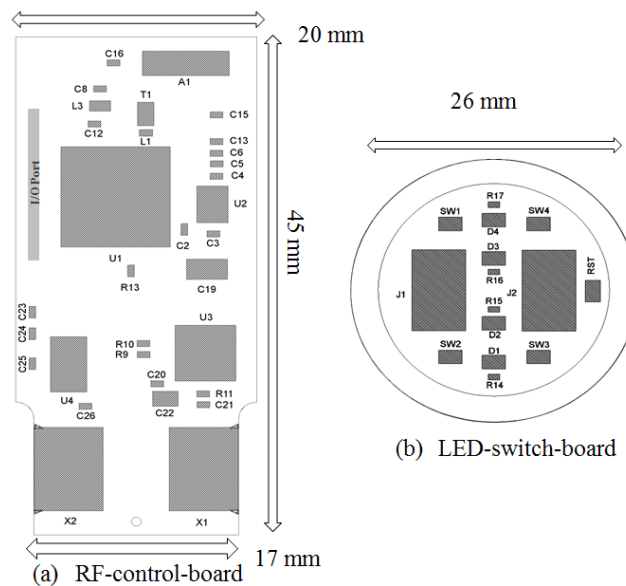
SMD part requirements and board dimensions (a) RF-control-board (b) LED-switch-board
